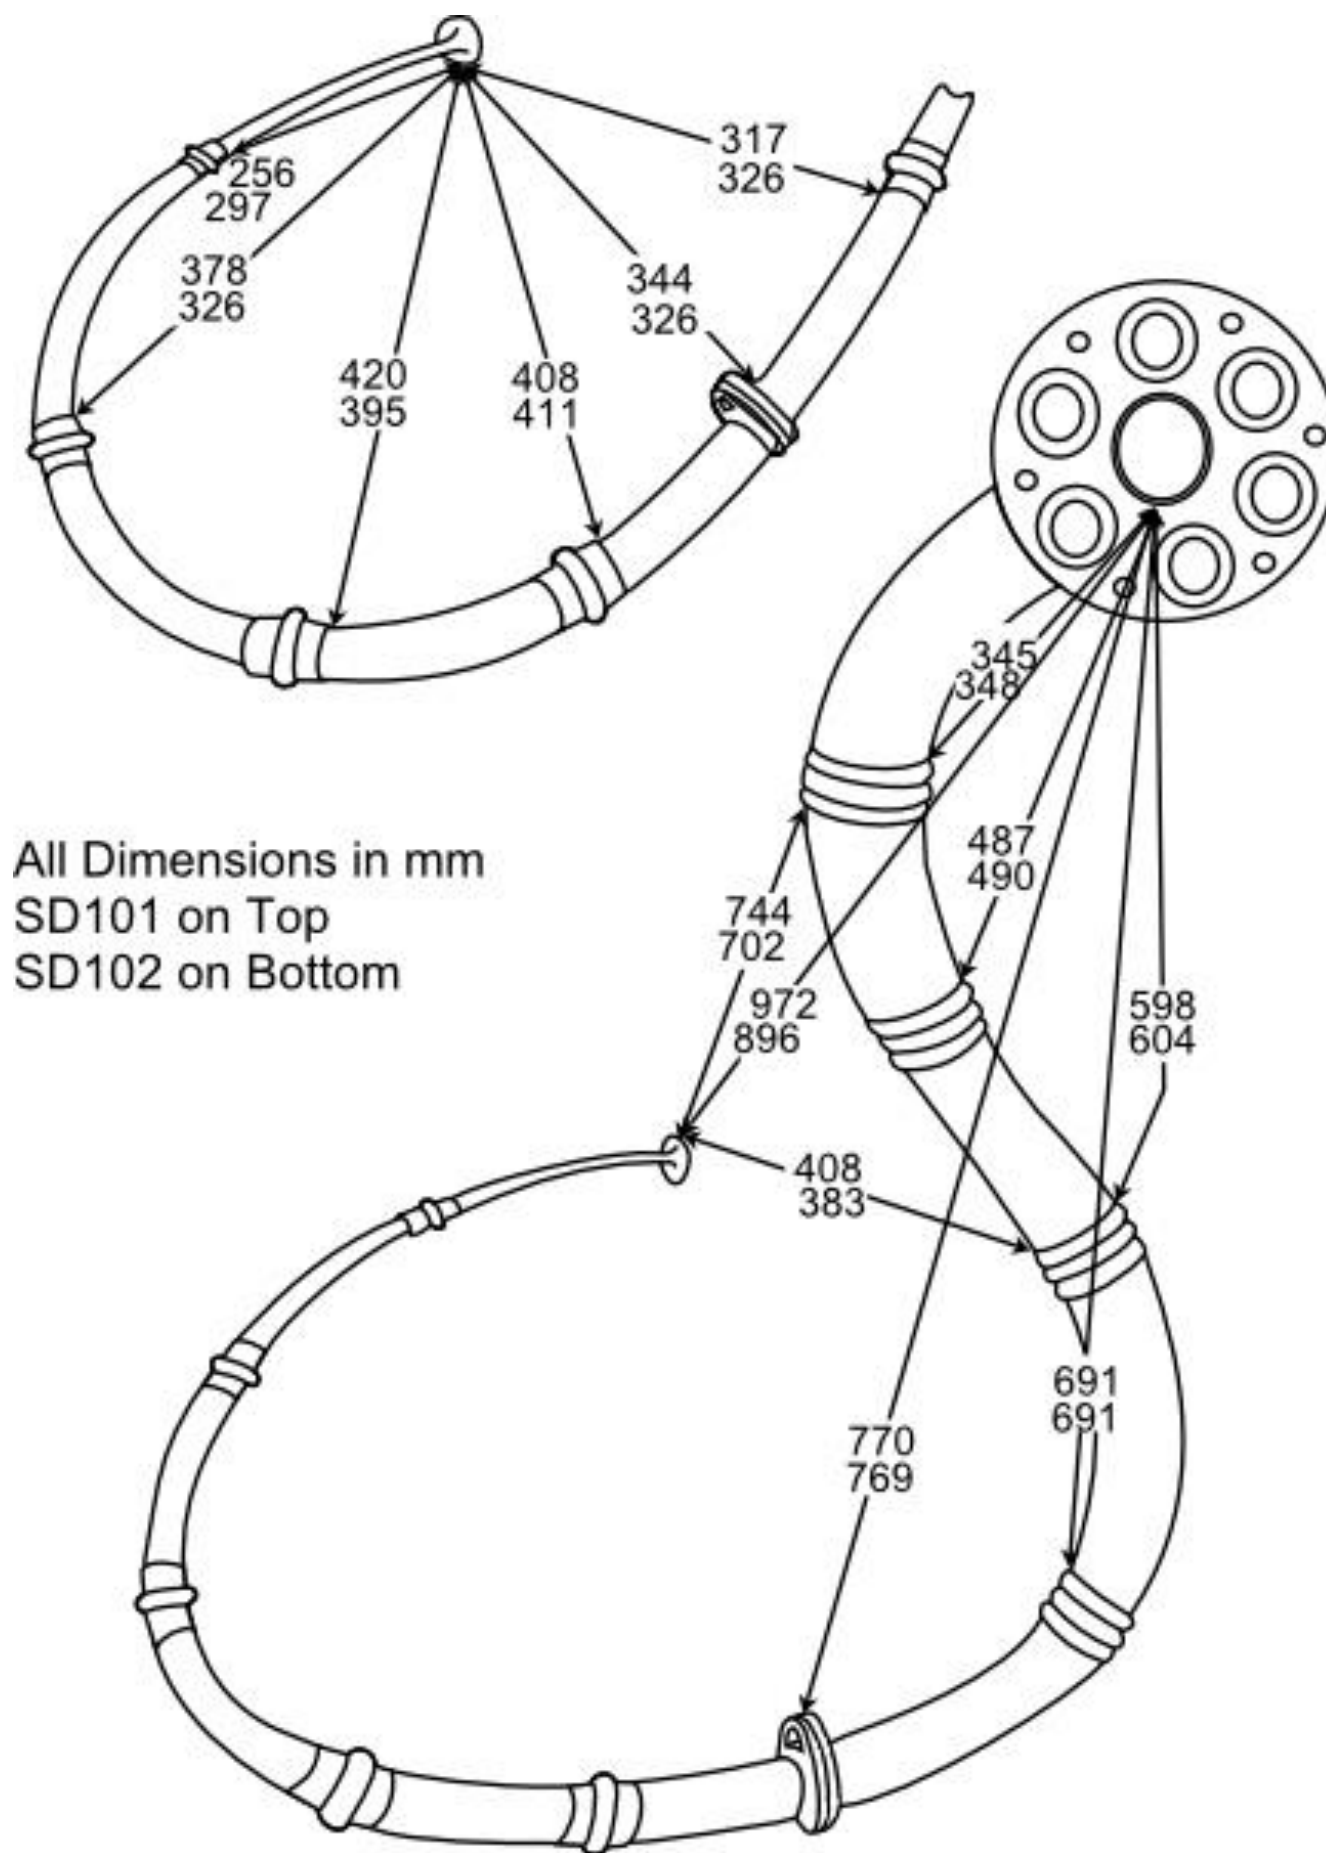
Assembled Dimensions of the Brudevalte SD101/2Lur Pair
